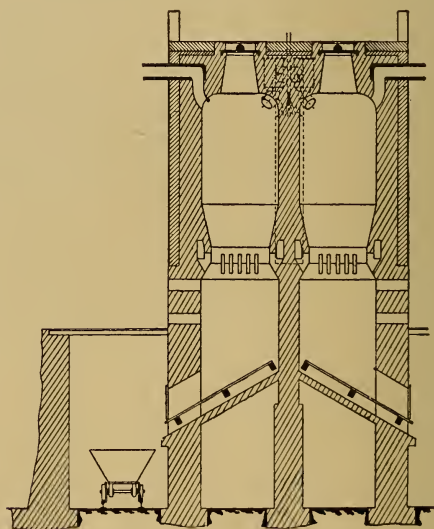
SECTION OF JAHNS PRODUCER WITH FOUR SHAFTS
